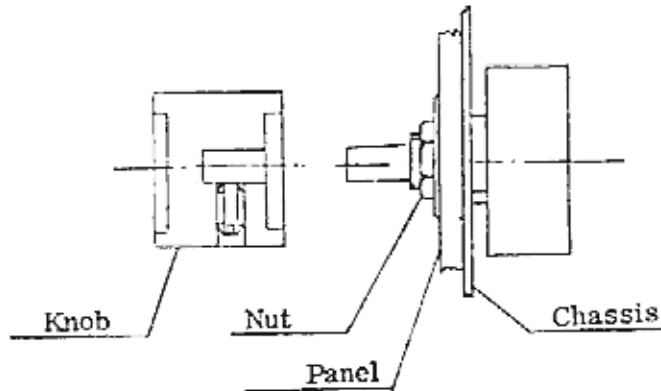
KNOB & SHAFT ASSEMBLY FOR BFO PITCH
